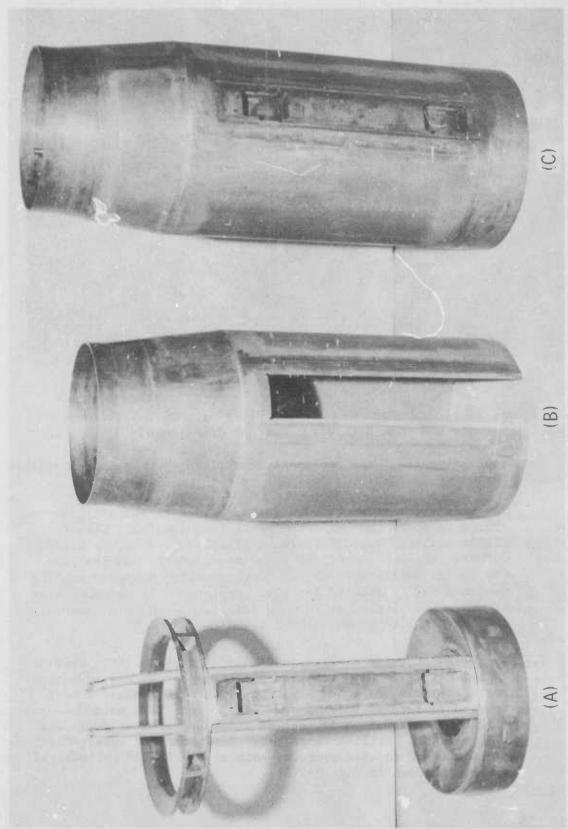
Aft Subassembly, Forward Subassembly, and Final Weldment.
